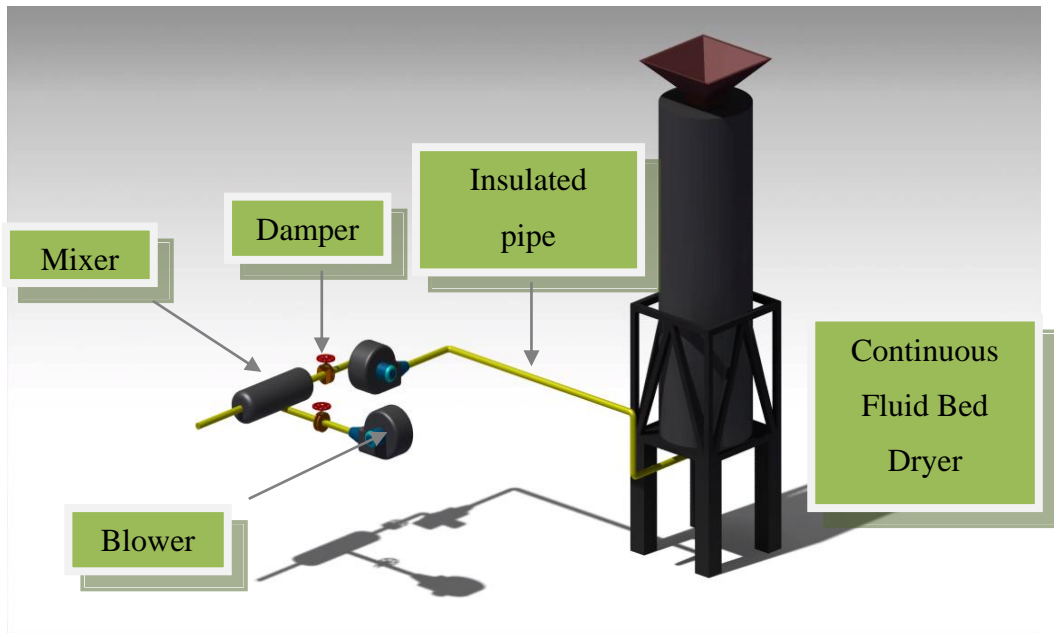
Overall 3D design; Dryer, Mixer, 2 Blowers, 2 Dampers
